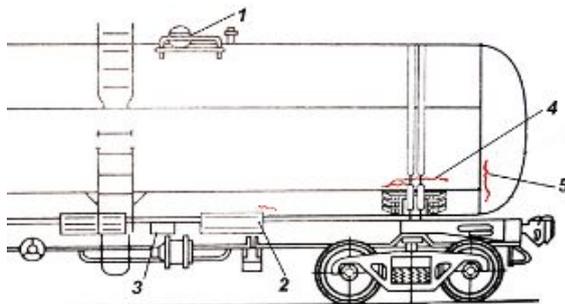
Zones of tank wagon boiler damages: 1. – welded joints of hatchway; 2 – welded joints of pads; 3 – welded joints of discharging device; 4 – welded joints of boiler edge ring at sill supports; 5 – welded joints of bottom.
